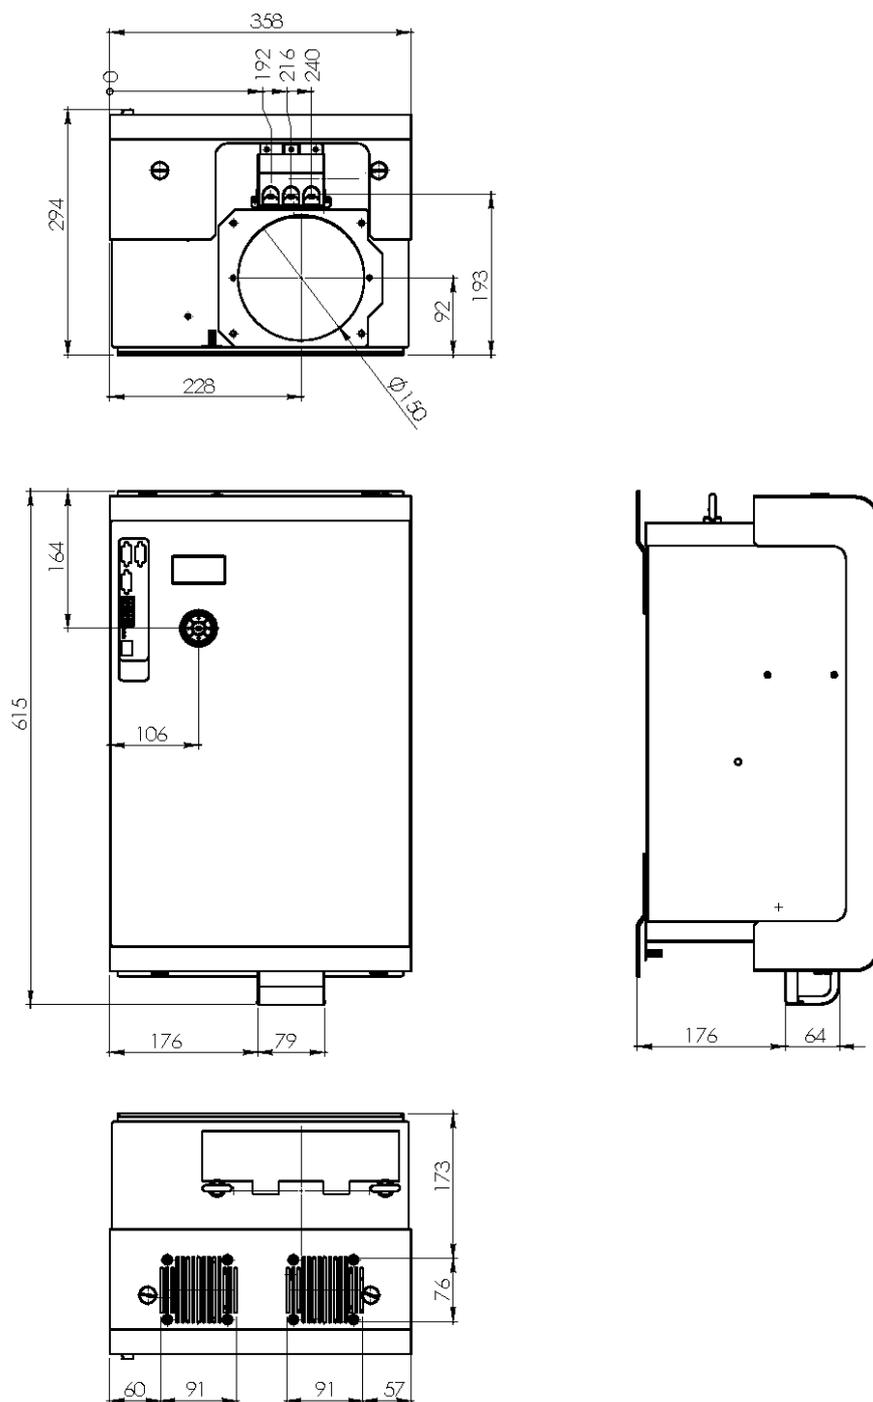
Dimensional drawings ECOsine® active-030/050-xxx-3
